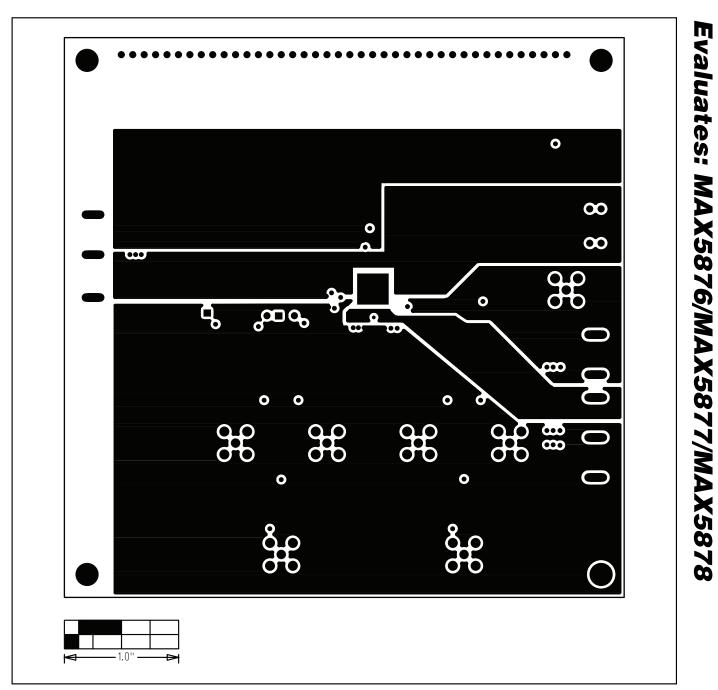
MAX5878 EV Kit PC Board Layout—Power Planes (Layer 3)
